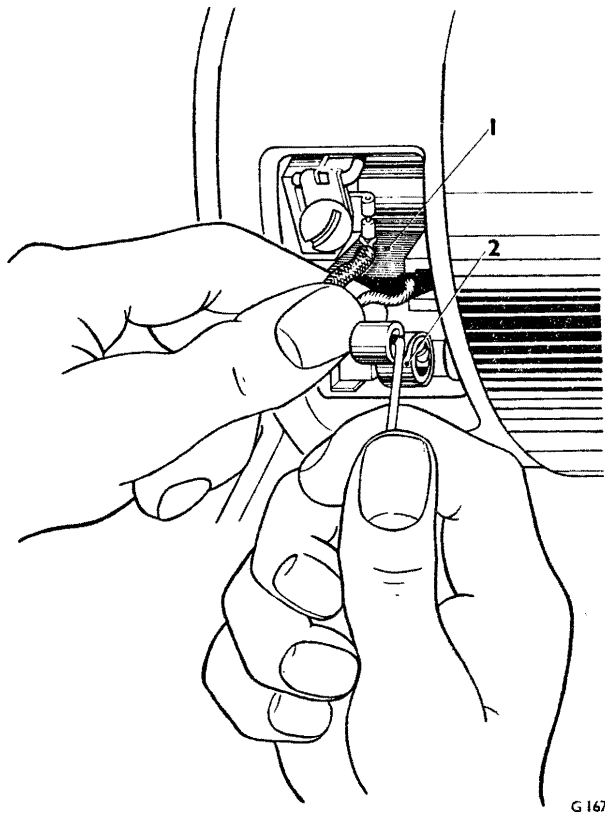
CHECKING GENERATOR BRUSHES FOR FREEDOM OF MOVEMENT
